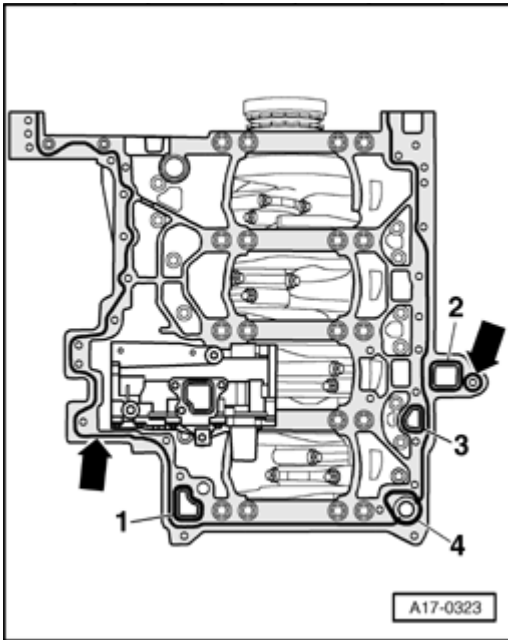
Inserting New Seals Into Grooves On Cylinder Block
